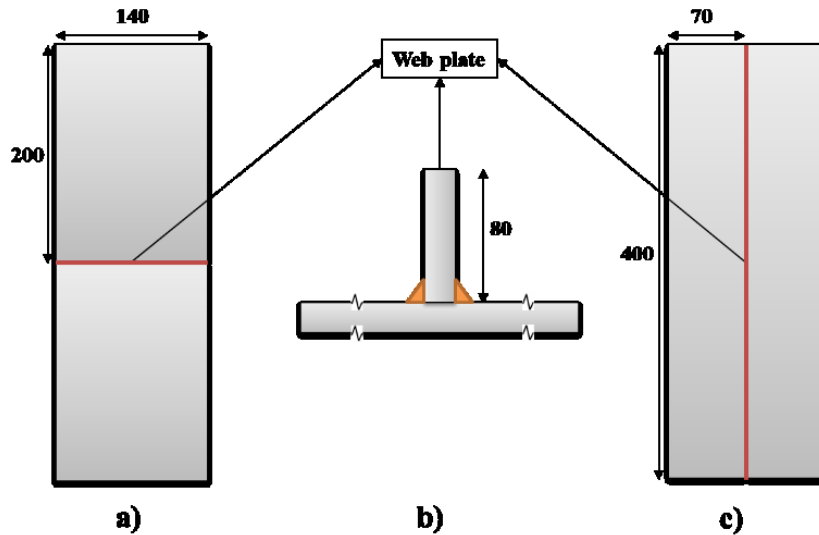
Illustration of orientation details on fillet welded plates: a) Fillet welded plate with the short weld along 140mm edge, b) fillet weld cross-section and web plate details, and c) fillet welded plate with the long weld along 400mm edge.
